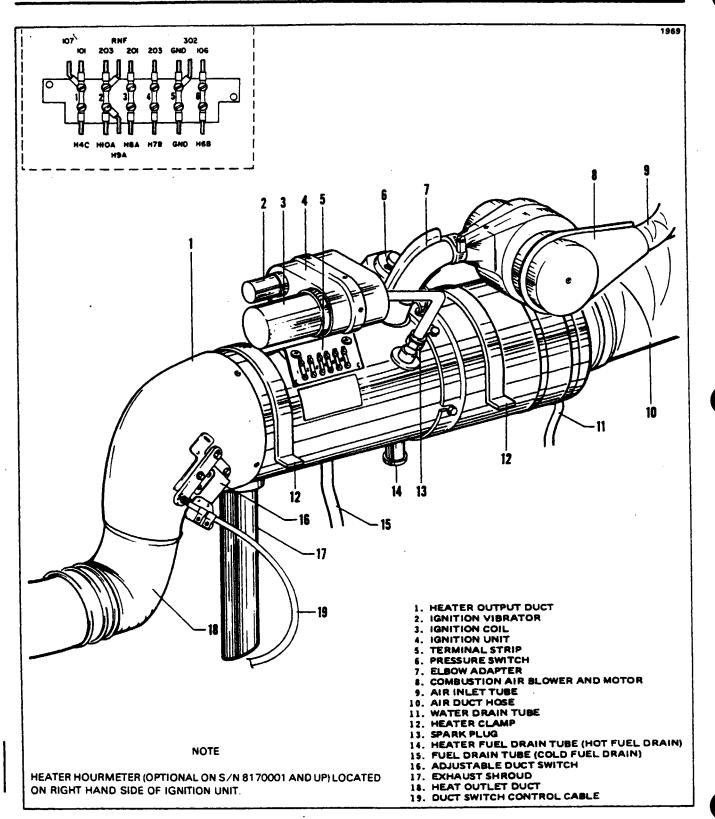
Heater and Combustion Air Blower Assembly (45,000 BTU)
